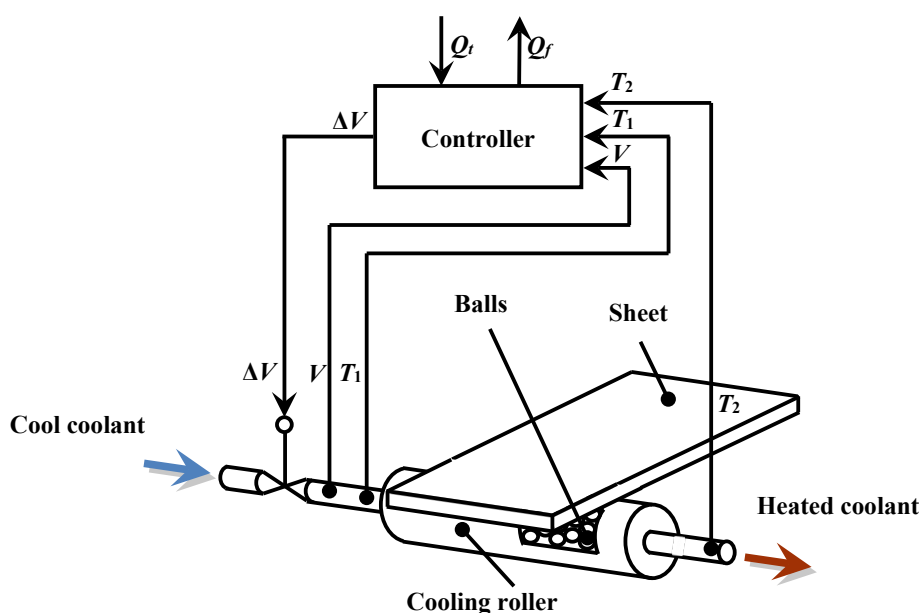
ACS cooling module for roller table sheet rolling mill.
